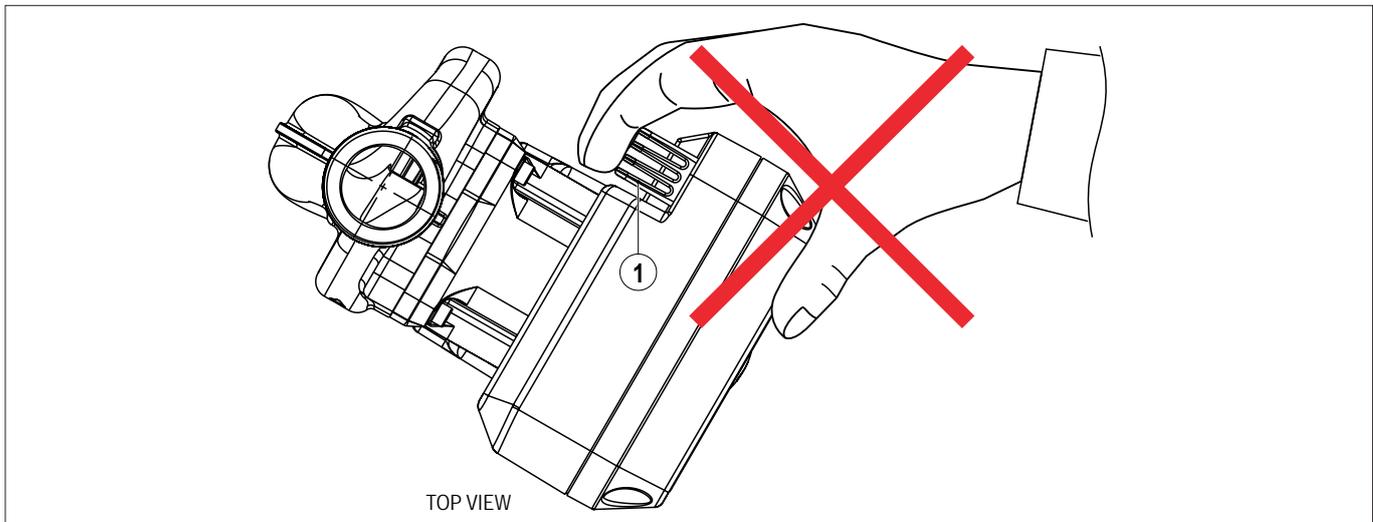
(It is forbidden to handle the circulator holding it on the heat sink)
